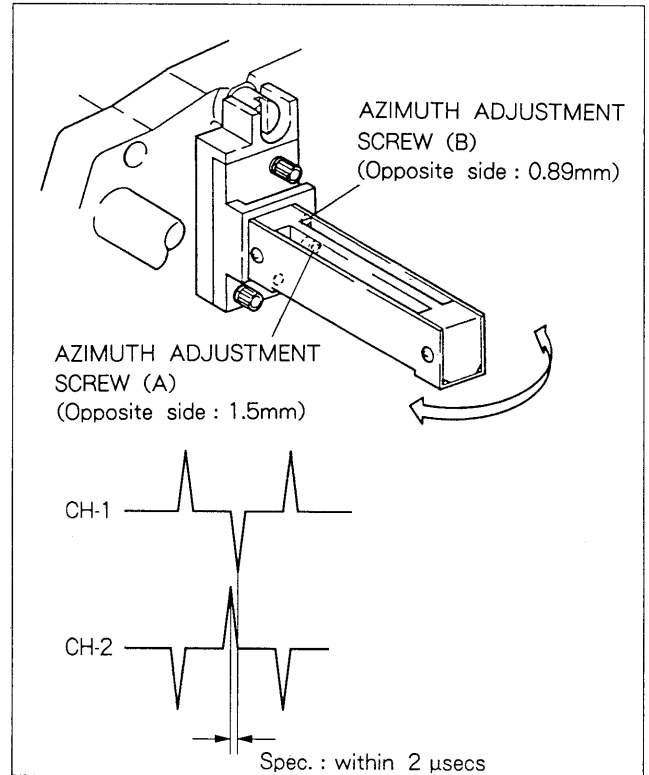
Audio PB Head Azimuth Adjustment
